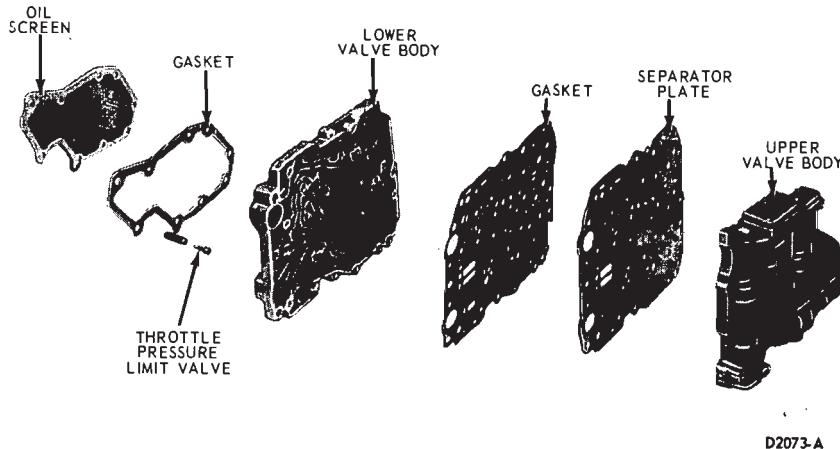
Upper and Lower Valve Bodies Disassembled—C4 Automatic—All Except Falcon
